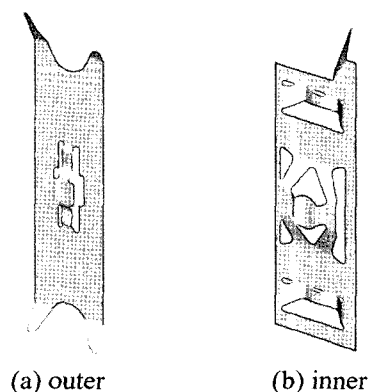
Detailed Drawing of the Unit Outer and Inner Spring for the Opt. H Type Grid
